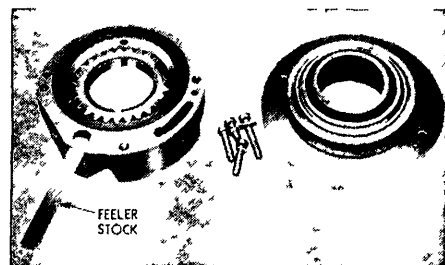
Install relief valve and spring in pump body. Press down on valve and insert feeler stock in slot to hold valve down. Place cover on pump body
